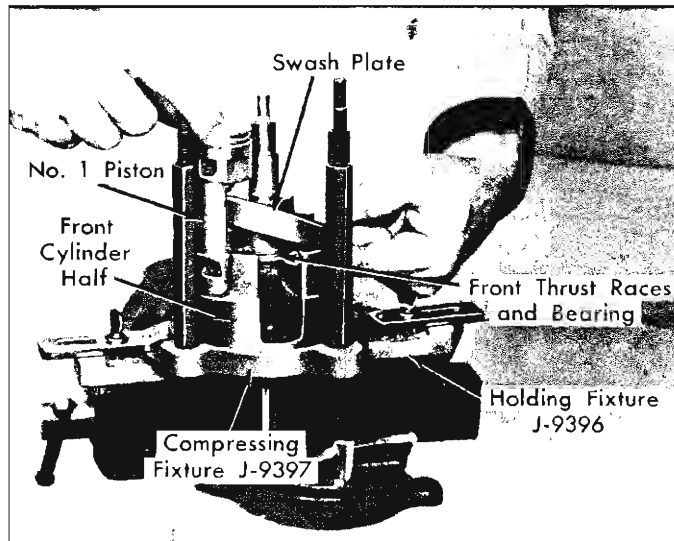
Installing Piston, Front Ball and Seat and Rear Ball
